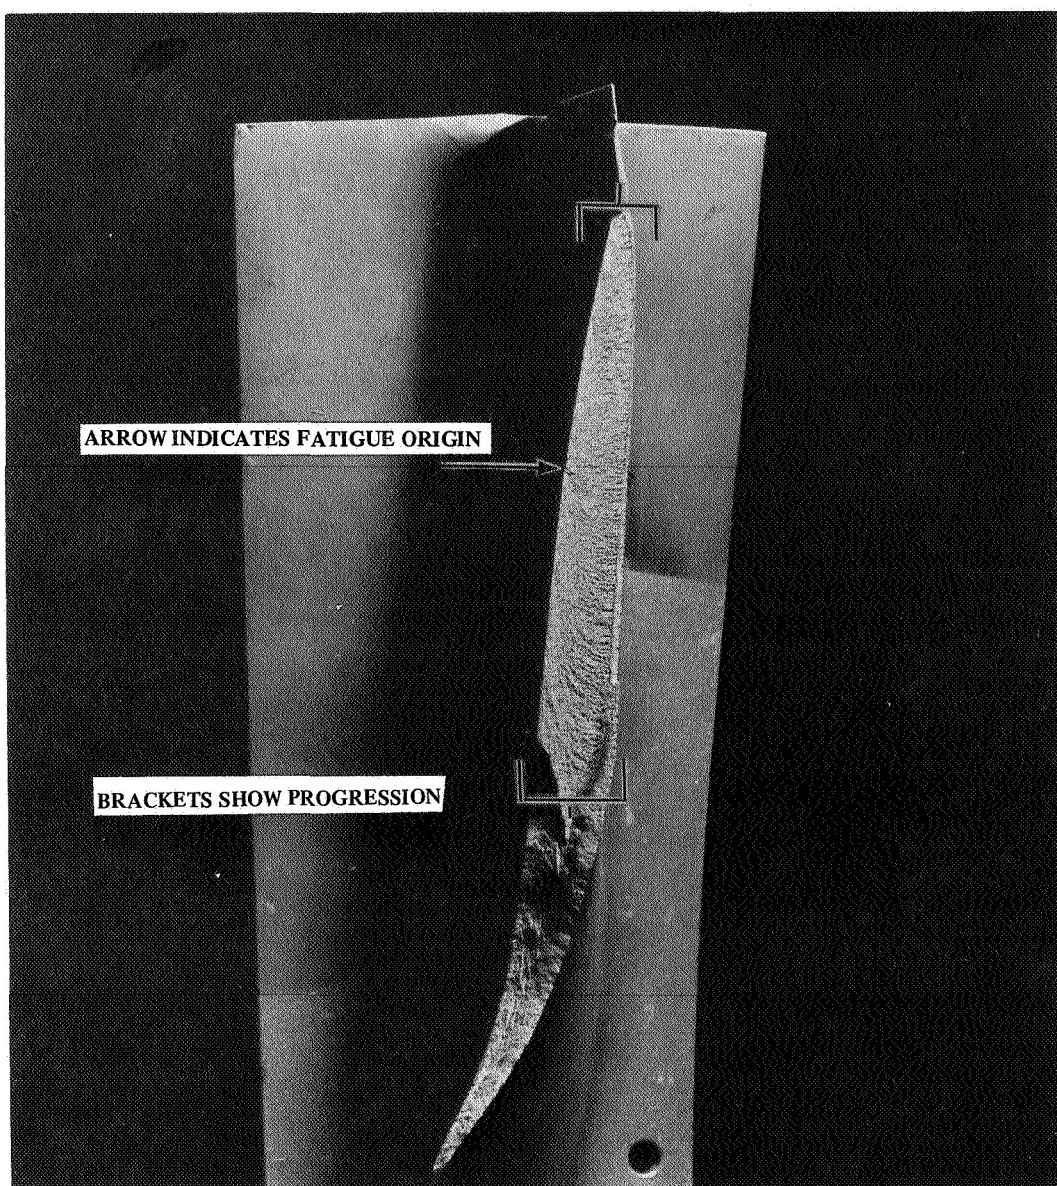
Fatigue Progression on Failed Rotor Blade No. 2
